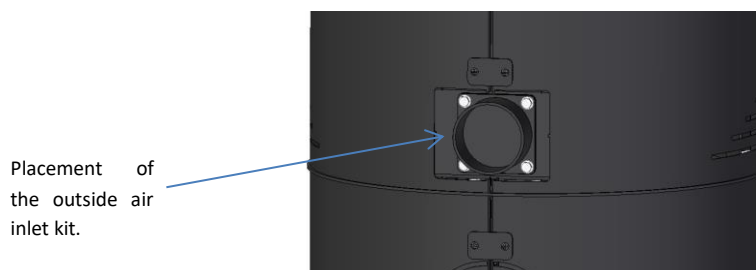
Rear view of the equipment, placement of the outside air inlet kit
